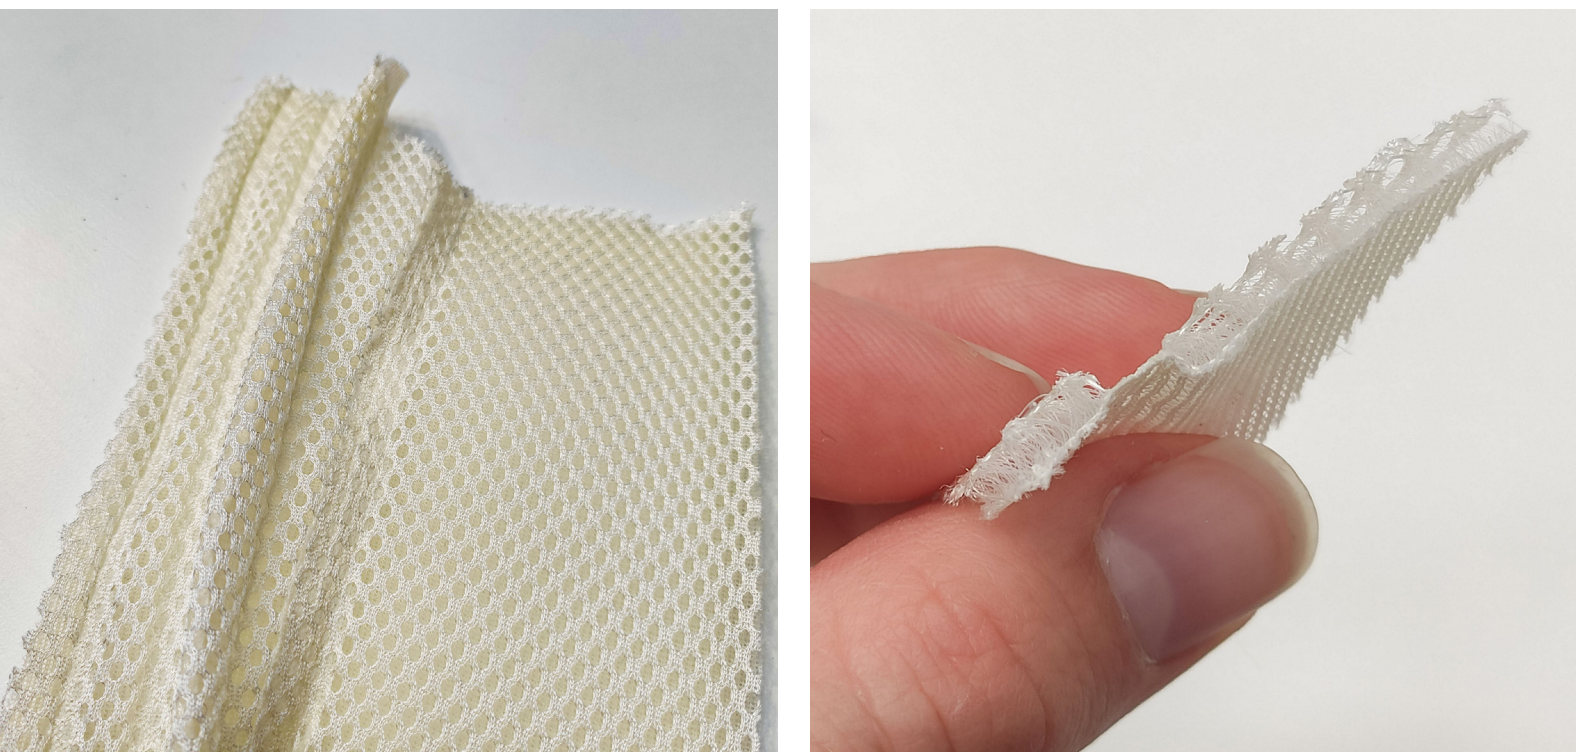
Glued textile housing with visible glue (left) and welded part with no observable glue (right).
